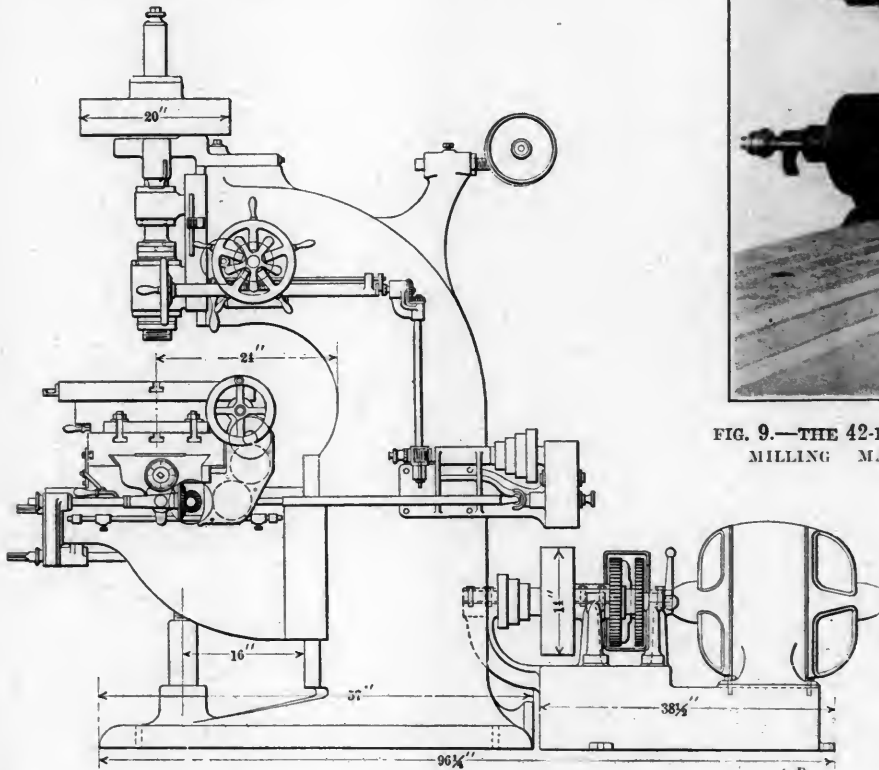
FLOOR MOTOR DRIVE AS APPLIED TO A BECKER-BRAINARD VERTICAL MILLING MACHINE.
